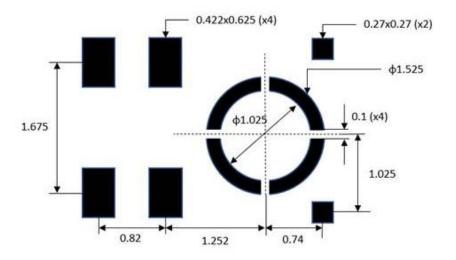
Suggested Solder Paste Stencil Pattern Layout
